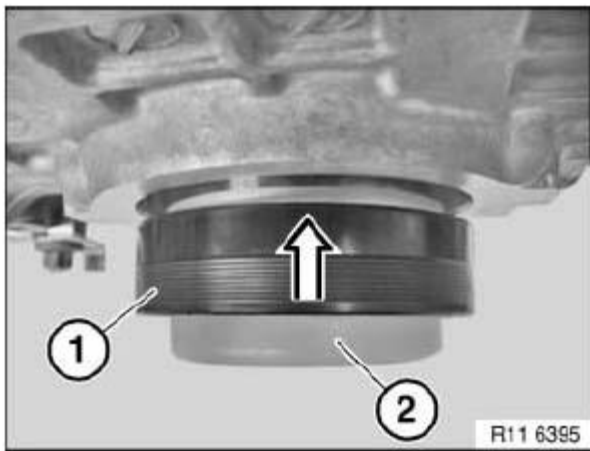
Identifying Radial Shaft Seal And Support Bushing
